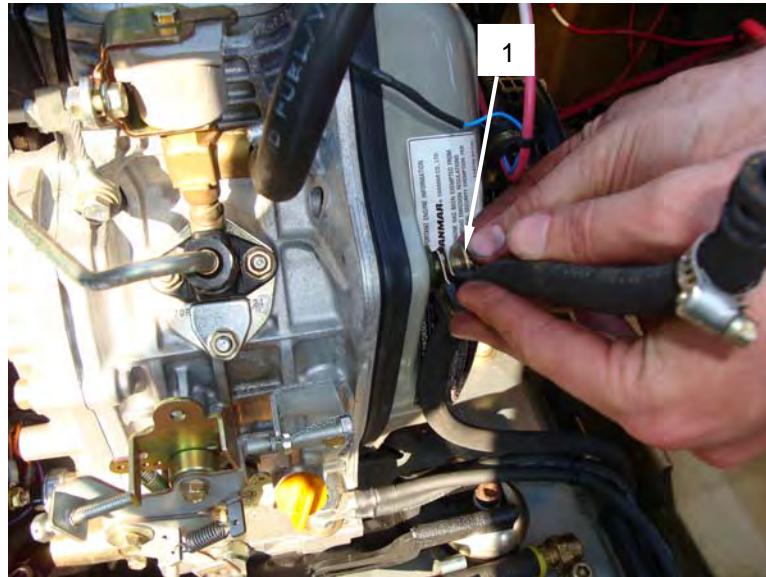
Install Fuel Line Clamp to Midpoint of Flywheel Housing.
